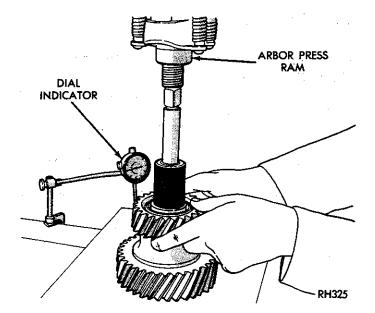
Assembling/Adjusting Idler Gear And Bearings
